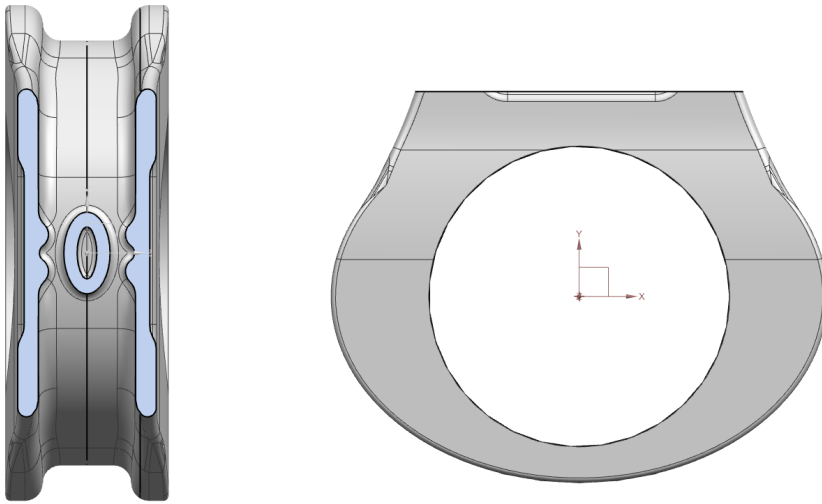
Cross-section of 2.0 beam; bottom beam section.
